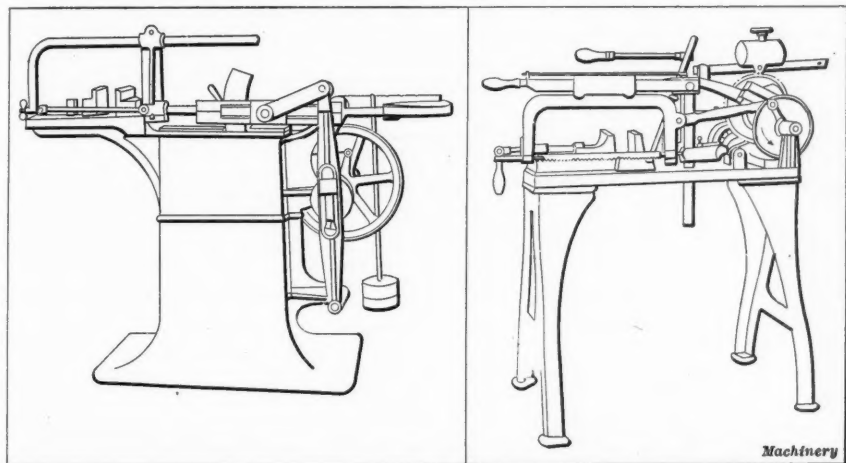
The Eureka Hacksaw Machine. Fig. 4. The Milford Machine, an Improved Type
